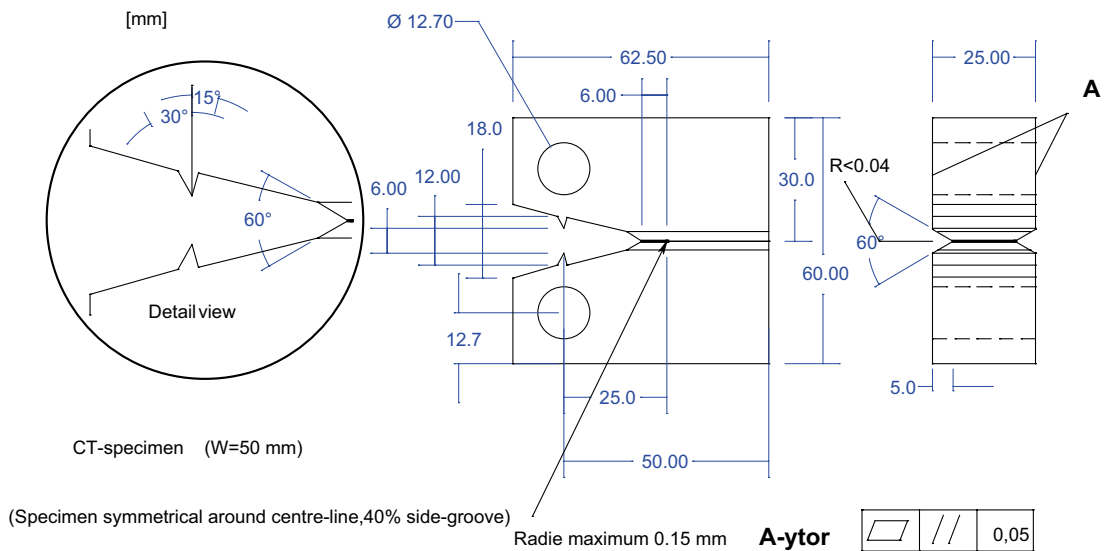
Geometry of compact tension (CT) specimen having $W = 50$ mm and side grooves.
